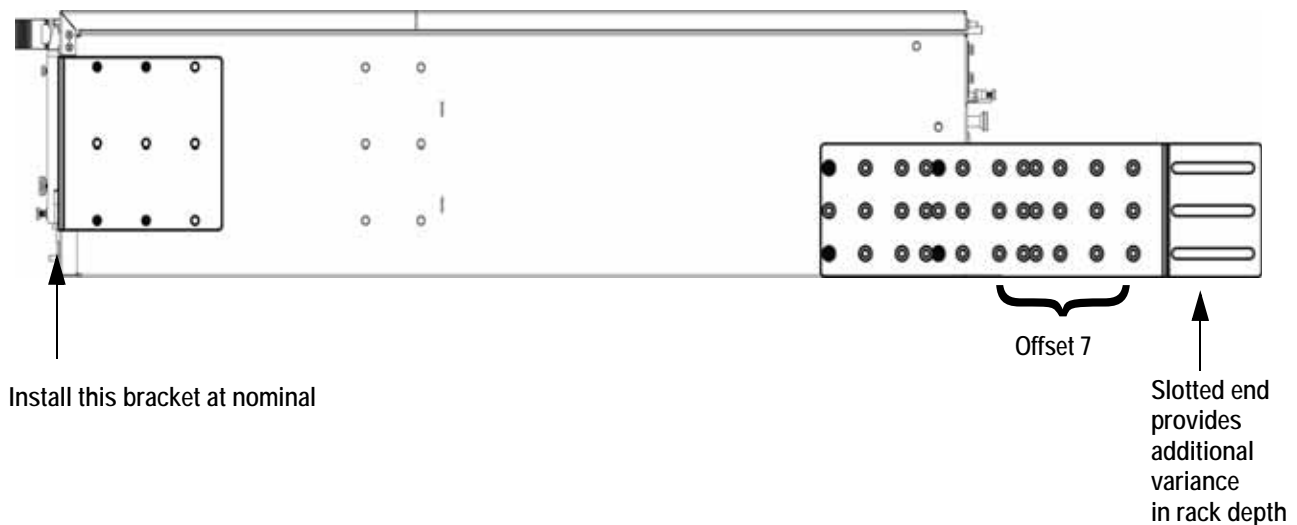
Bracket Mounting for 34.5" to 36" Rack
